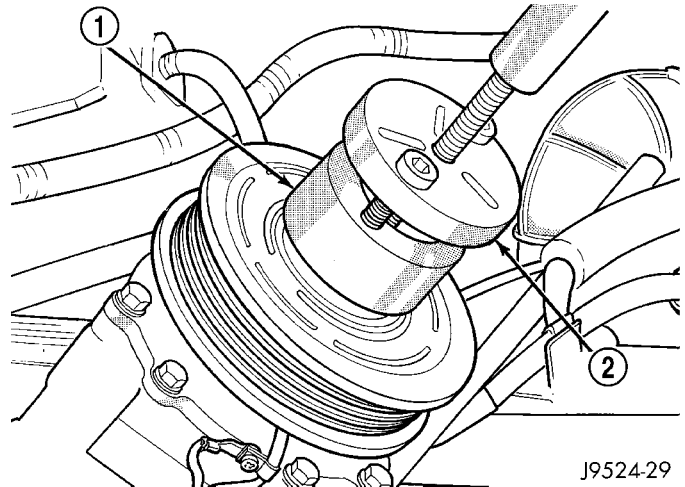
SHAFT PROTECTOR AND PULLER - Typical
